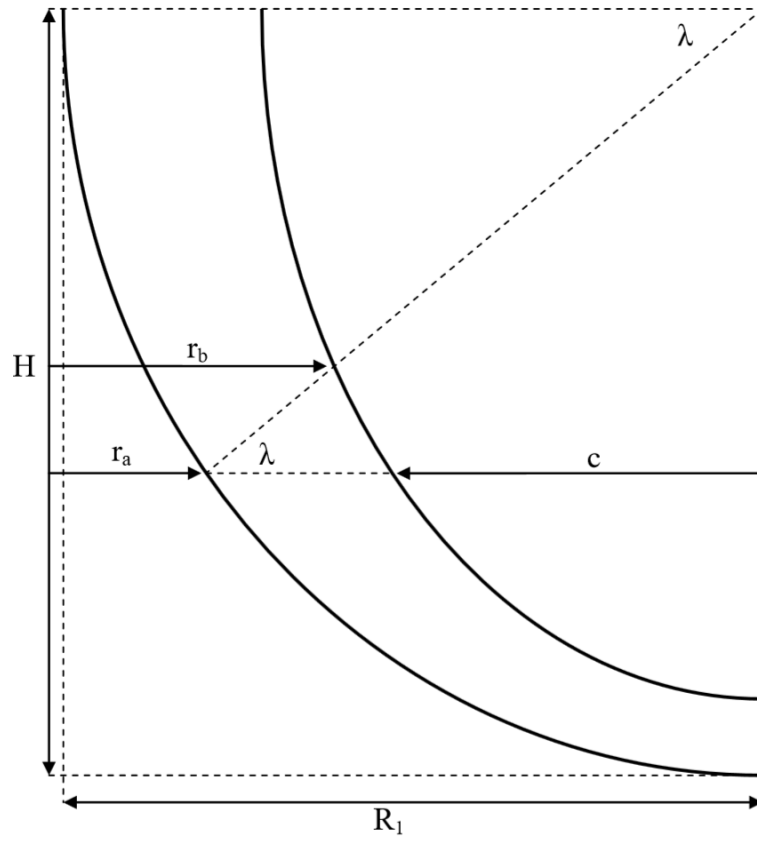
Cross sectional view and notation of compressor impeller blade profile
